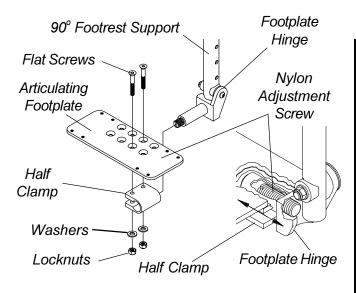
INSTALLING/ADJUSTING ADJUSTABLE ANGLE FLIP-UP FOOTPLATES
